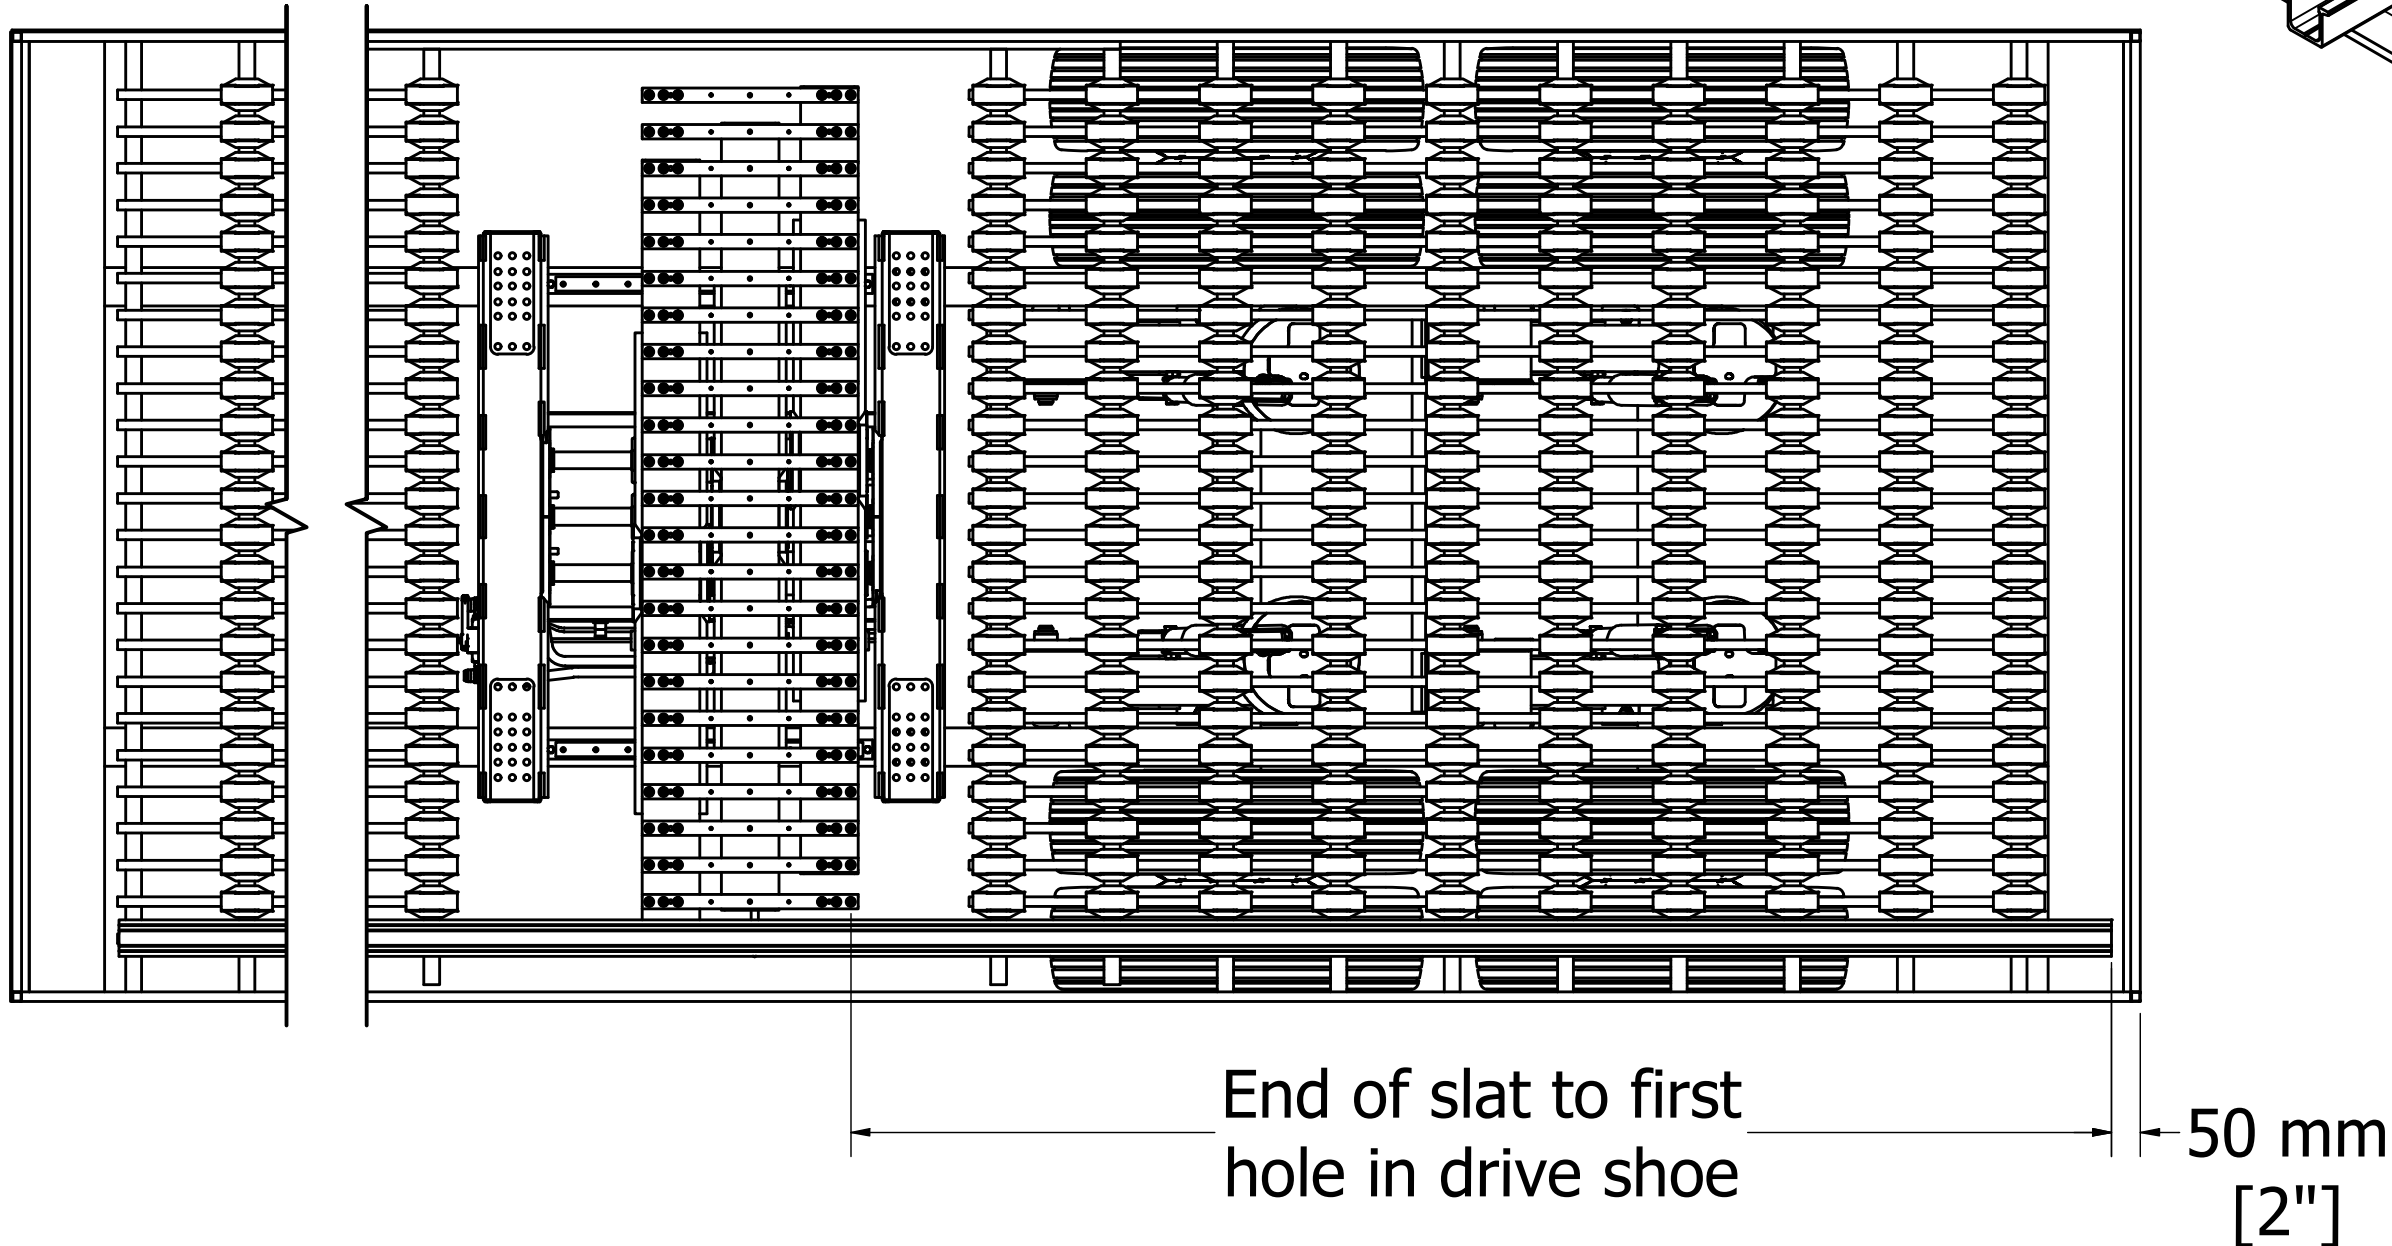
TRAILER TOP VIEW FOR FLOORING INSTALLATION
